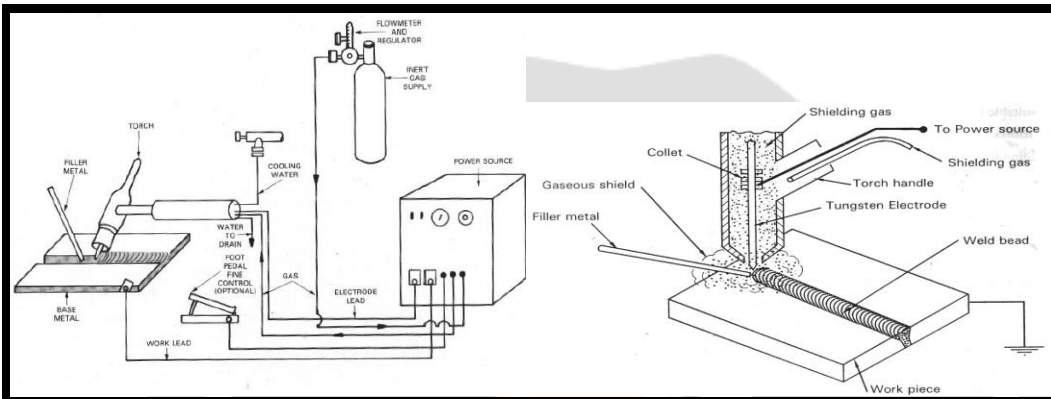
Construction, Working and Process of A-TIG Welding
